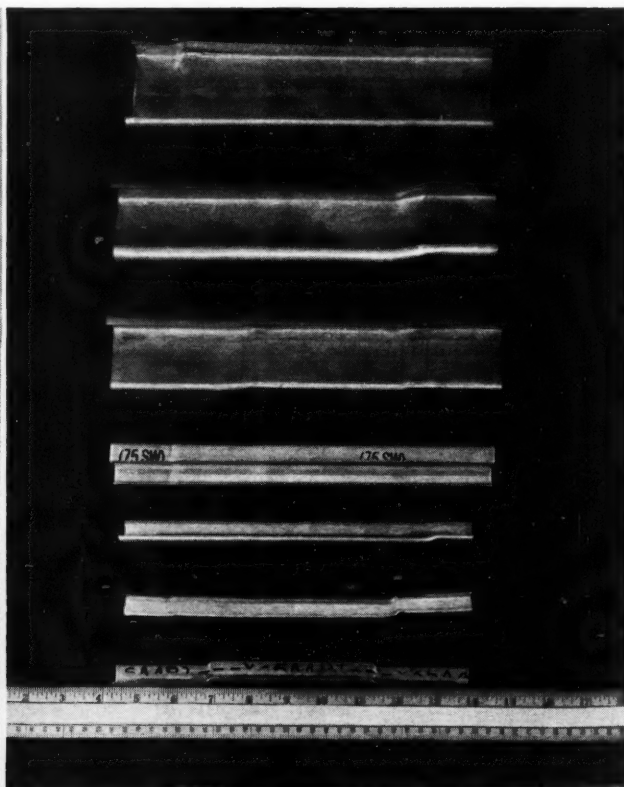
Typical parts produced by the machine shown in Fig. 1. An example of a perfect compound joggle is seen at bottom
